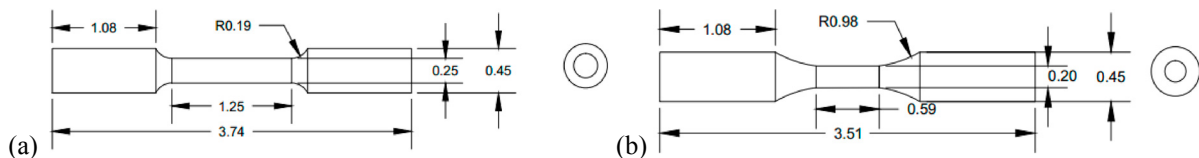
Specimen dimensions for (a) tensile test and (b) fatigue test.
